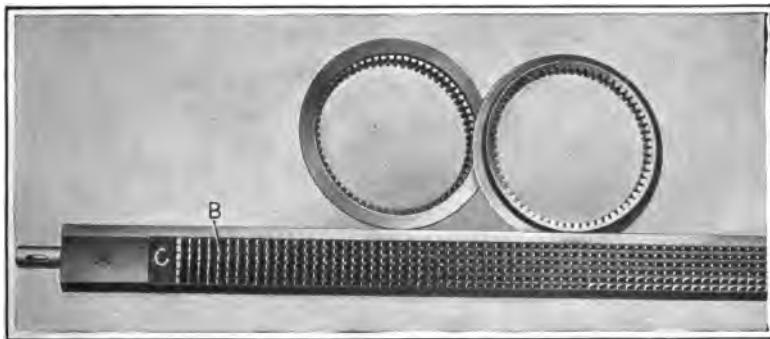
Close View of Broach and Two Gears Broached on Machine
